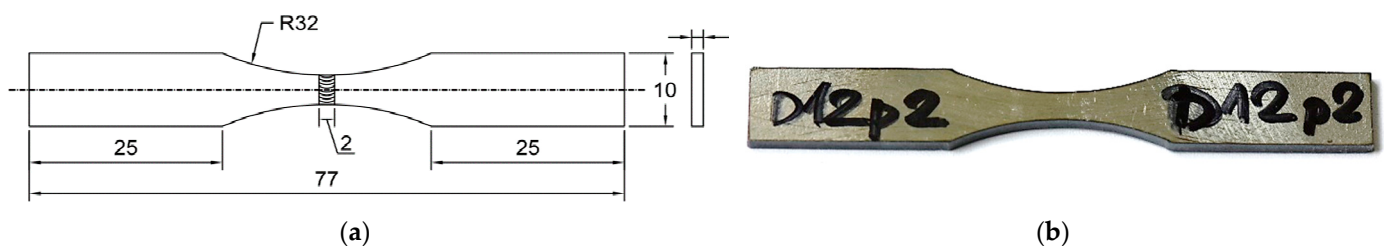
The hourglass specimen with the weld: (a) geometry, dimensions, and the weld location (unit: mm), (b) manufactured specimen, the nominal thickness was equal to 1.8 mm.
